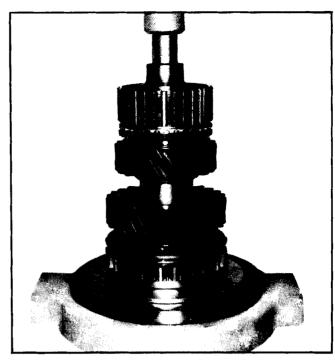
C-21 Installing 1st and 2nd Synchronizer and 2nd Speed Gear
